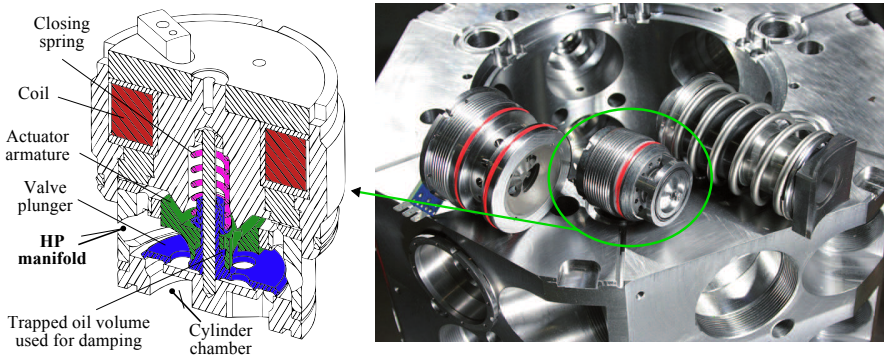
Valves and piston assemblies from 800 kW DD motor (right) [38], and patent illustration showing a HPV design which seem to be very similar [51].
